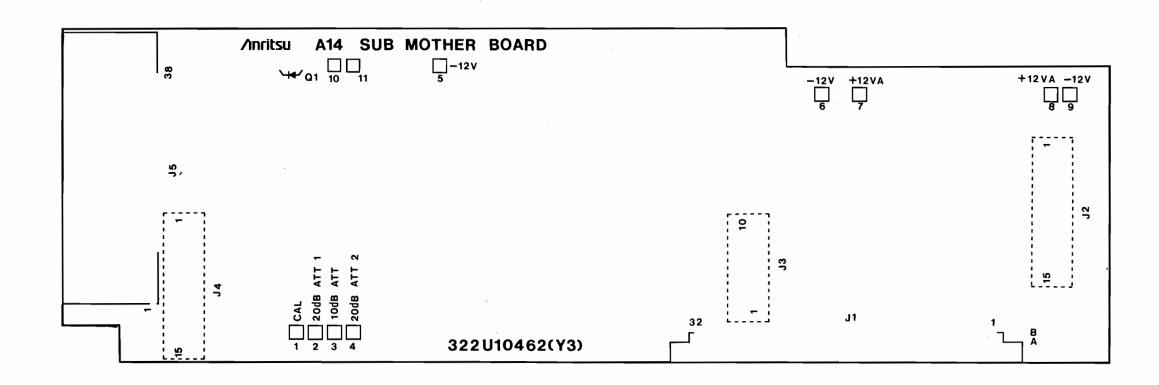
Al4 SUB MOTHERBOARD PC Board Parts Layout 25
